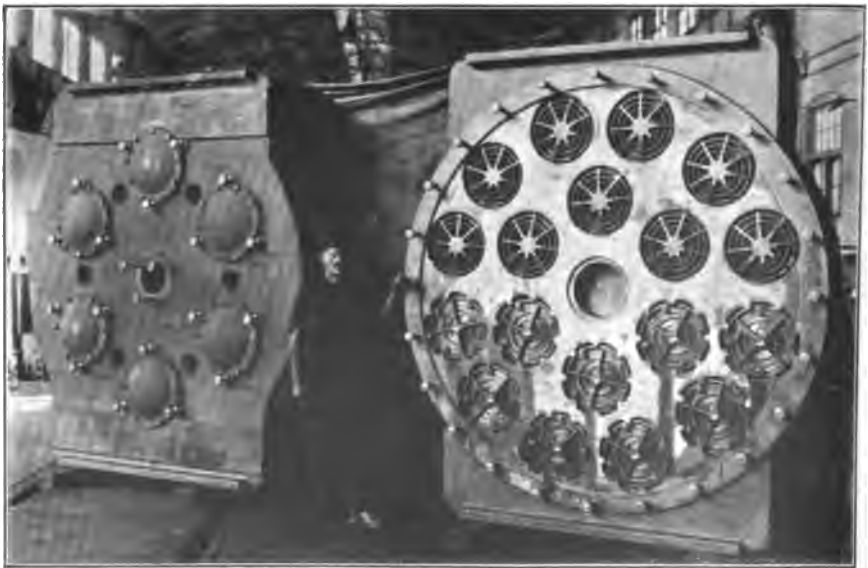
Blowing cylinder heads equipped with Ingersoll Rogler Valves inside and outside views.
